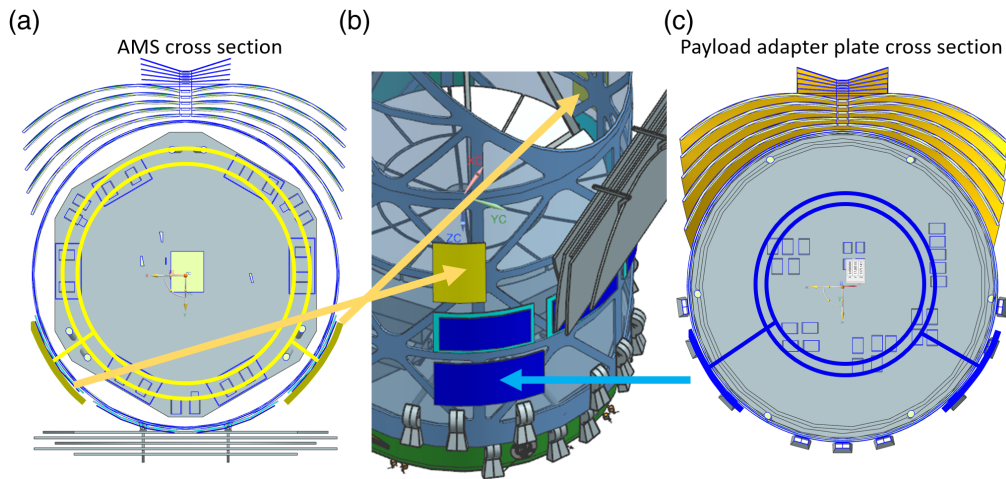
(a) Circular heat pipe layout at the AMS. Two rings connected to external radiators (b) provide cooling for the AMS-mounted electronics. (c) A similar layout at the payload adaptor plate provides cooling for the bus electronics.
